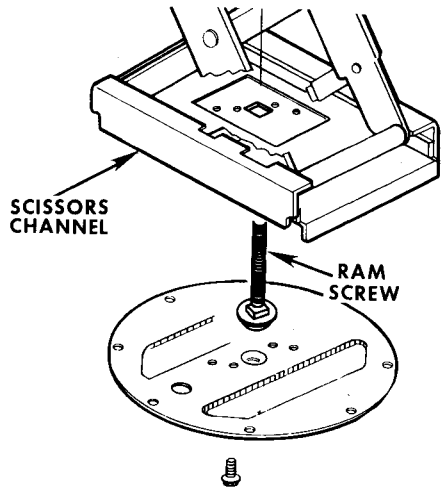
Ram Screw, Lower Channel and Disc Assembly.
